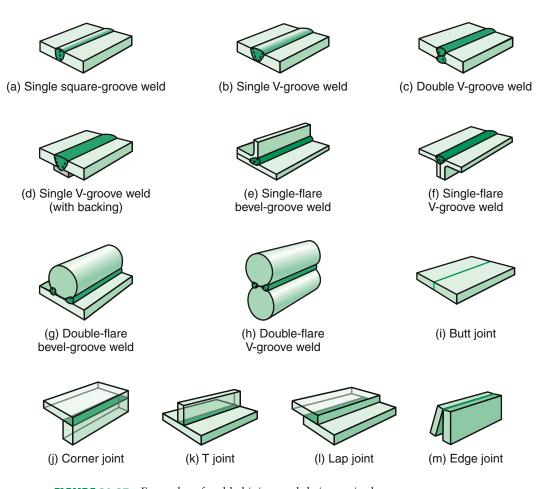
Examples of welded joints and their terminology.
